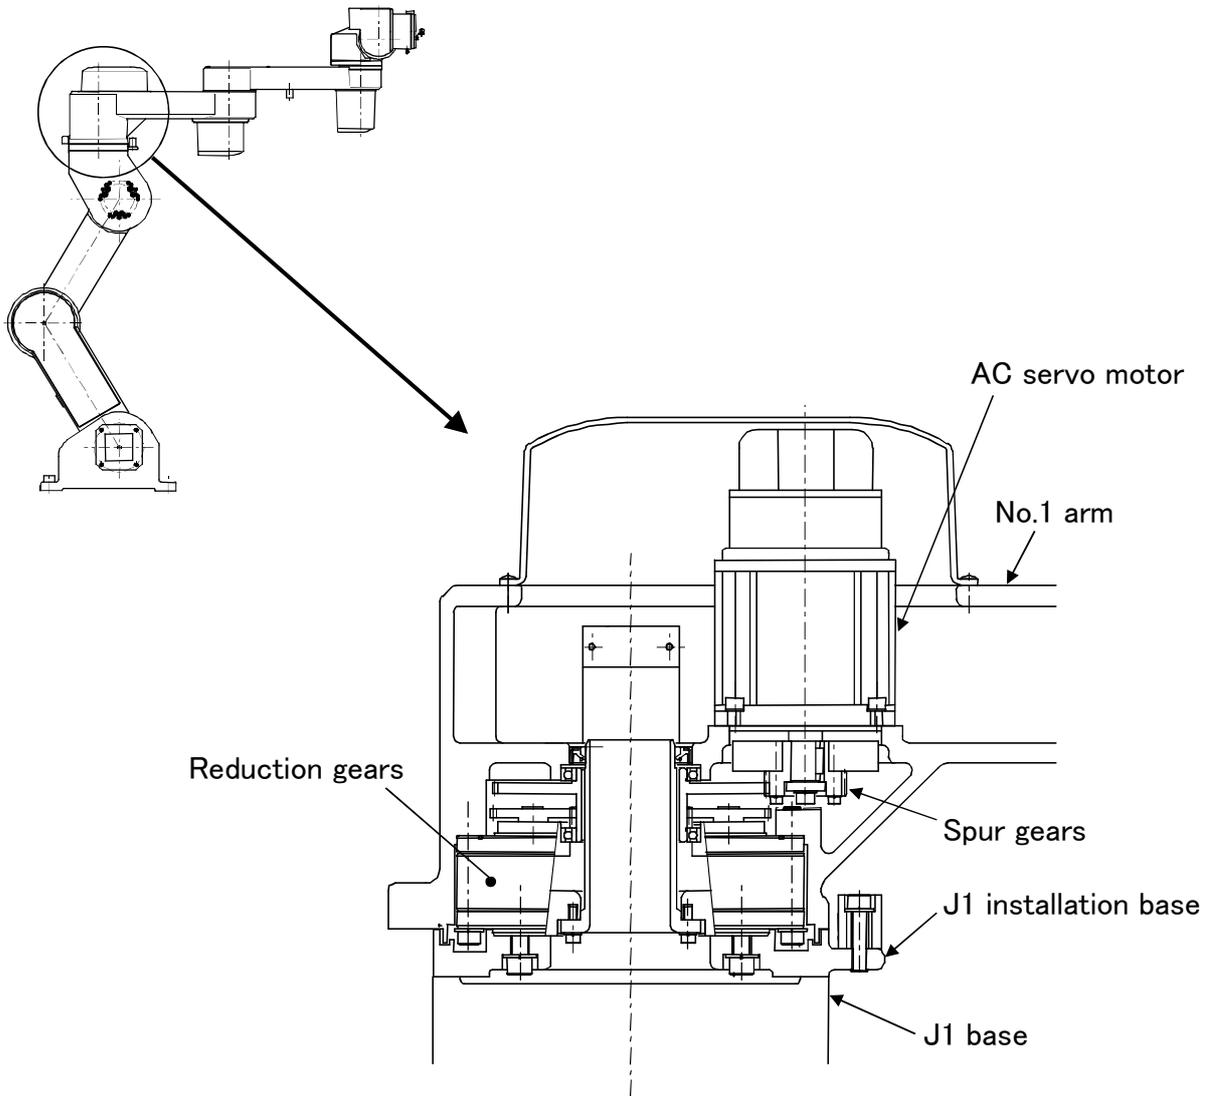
J1 axis drive mechanism (RH-1500G series)
